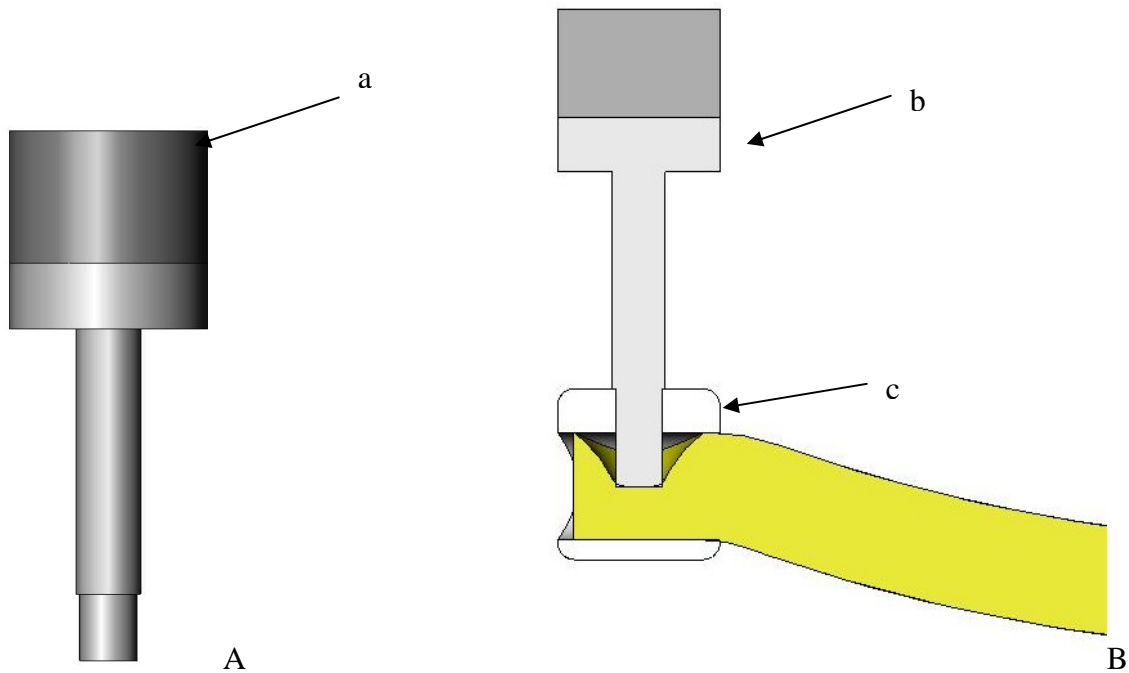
Assembly of sling retractor prototype. The magnet is epoxied onto the magnet mount (a). The magnet mount (b) was threaded into the tube holder (c) until the mount was tight against the tubing.
